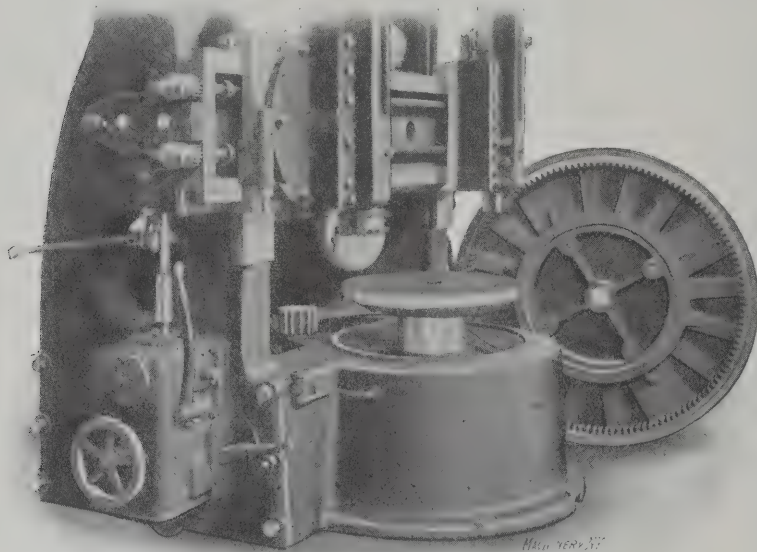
Details, showing Construction of the Spindle Bearing and Internal Gear Drive used on the 60- and 72-inch Mills
